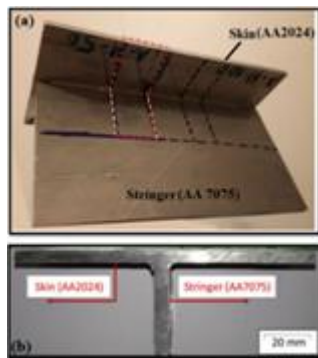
(a) the welded specimen of the T-joint before cutting; (b) A part specimen of T-joint after cutting perpendicular to the welding direction
